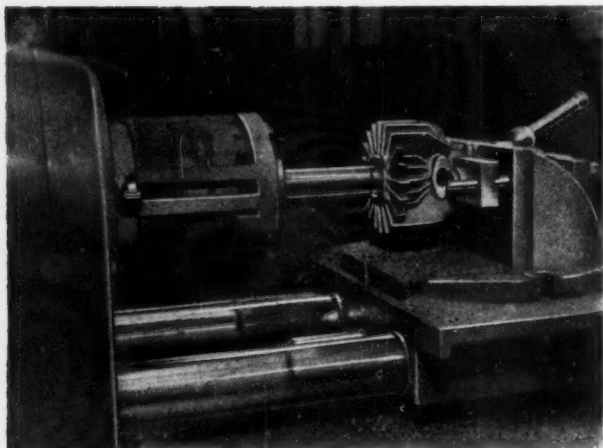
Set-up for Boring the Cylinder on a Grob Fine-boring Machine
